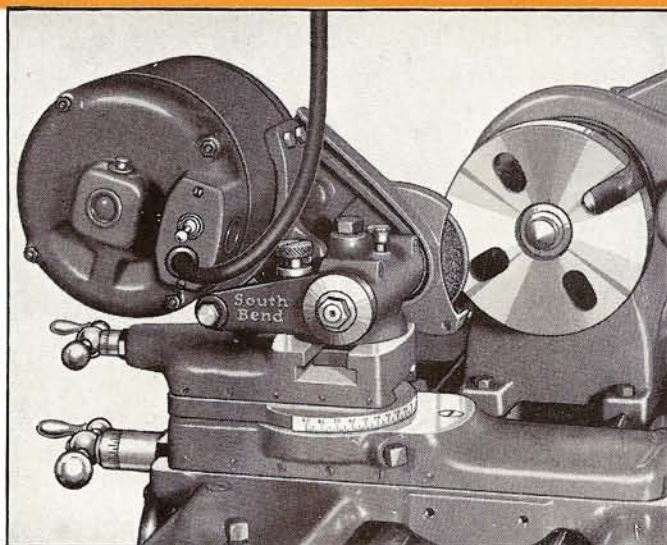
Electric Grinder Mounted on Compound Rest of Lathe
